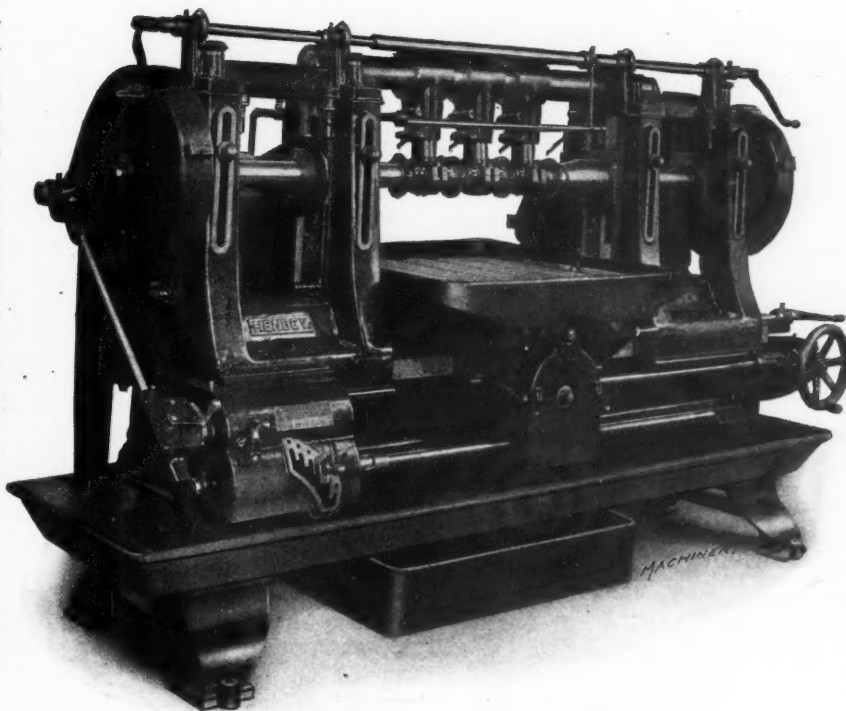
Front View of Hendey No. 16 Duplex Lincoln Miller
